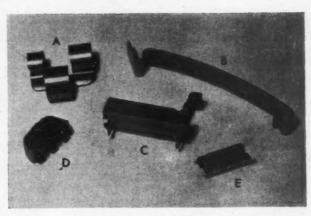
Typical parts produced on U.S. Multi-Slide machines, without secondary handling, from steel and brass coiled stock
